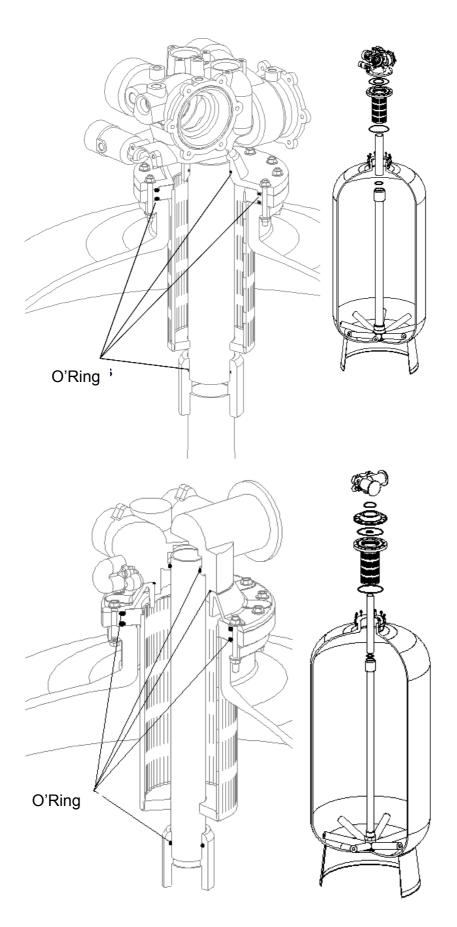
Figure VIII - "Assembling type 8000 hydraulic control block to softener body and installing the assembly"
